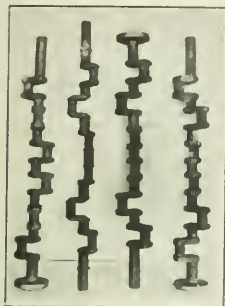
WELDED FORGED STEEL CRANK SHAFTS.
